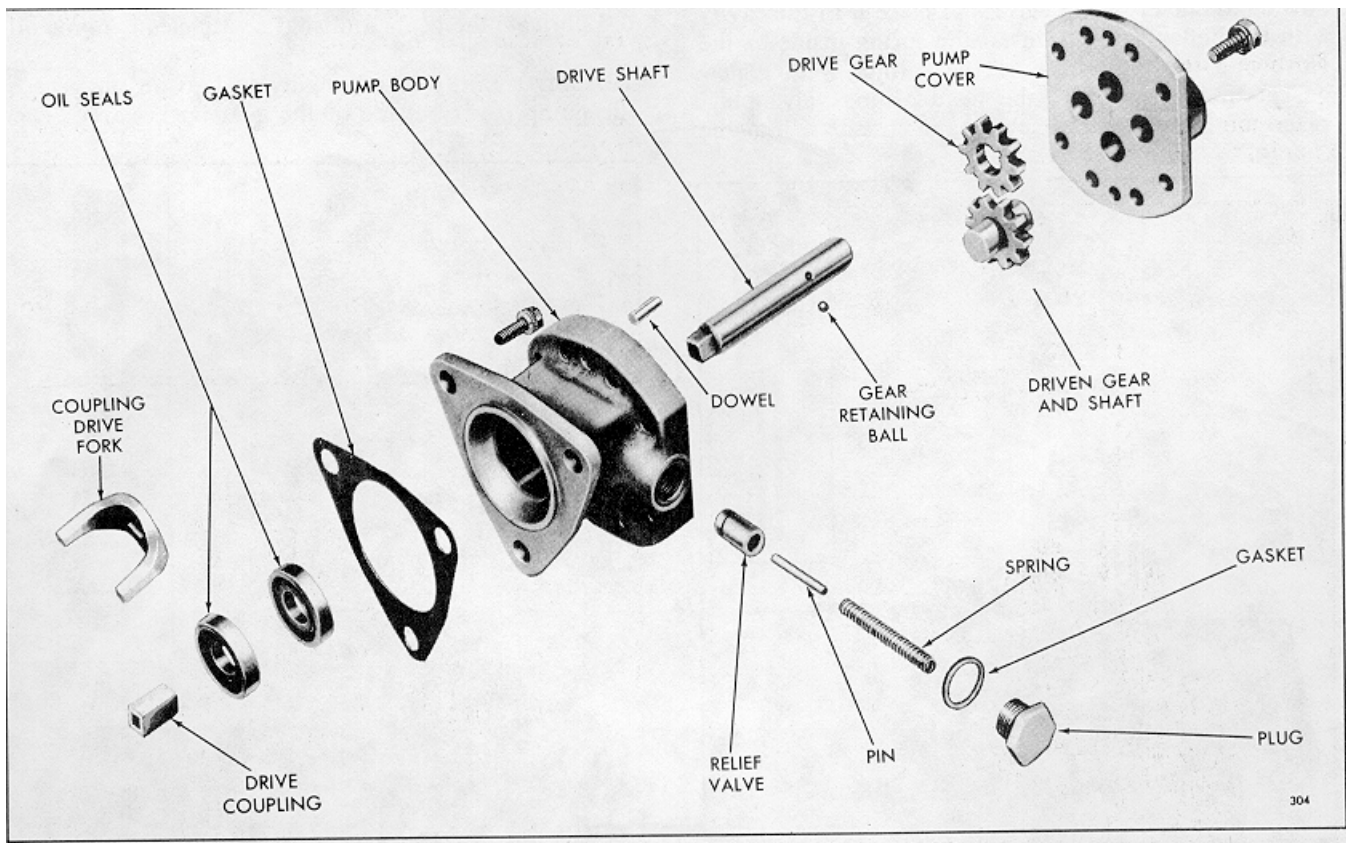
Fuel Pump Details and Relative Location of Parts
